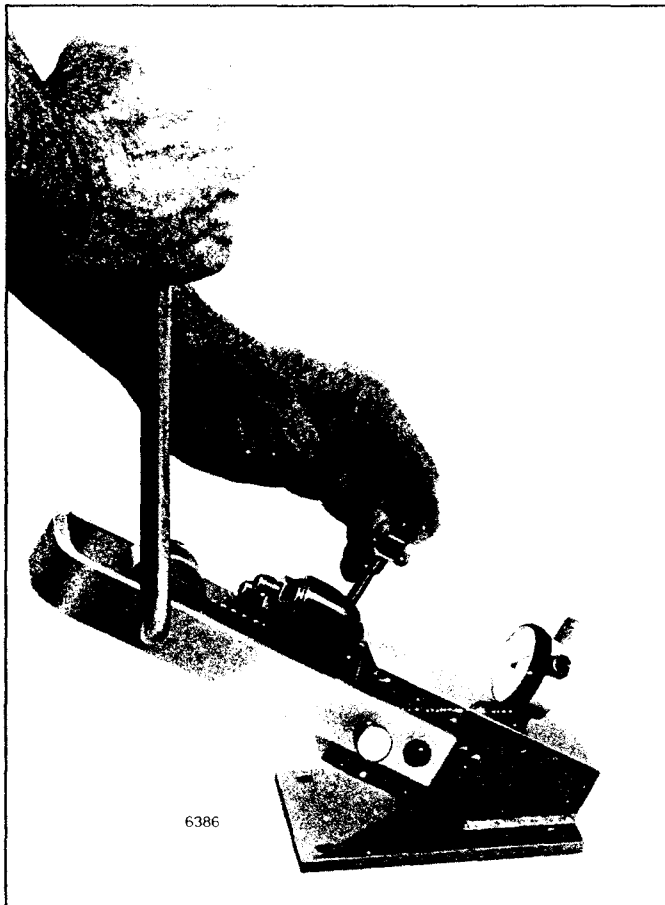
Checking Rack for Freeness in Tester J 29584
